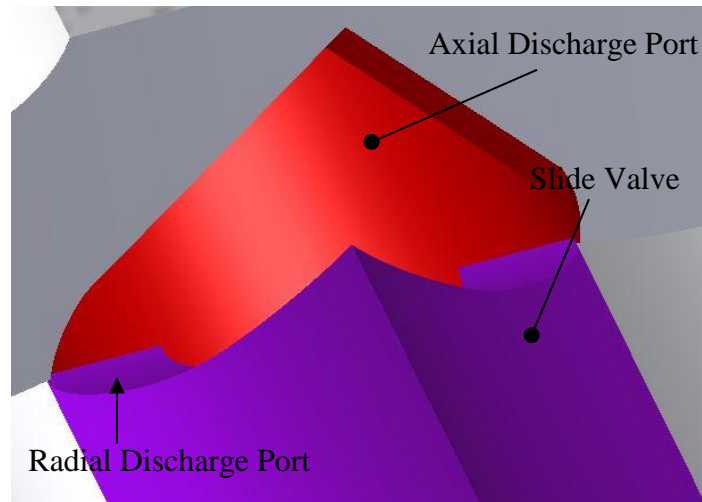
Twin Screw Compressor Discharge Port with Slide Valve
